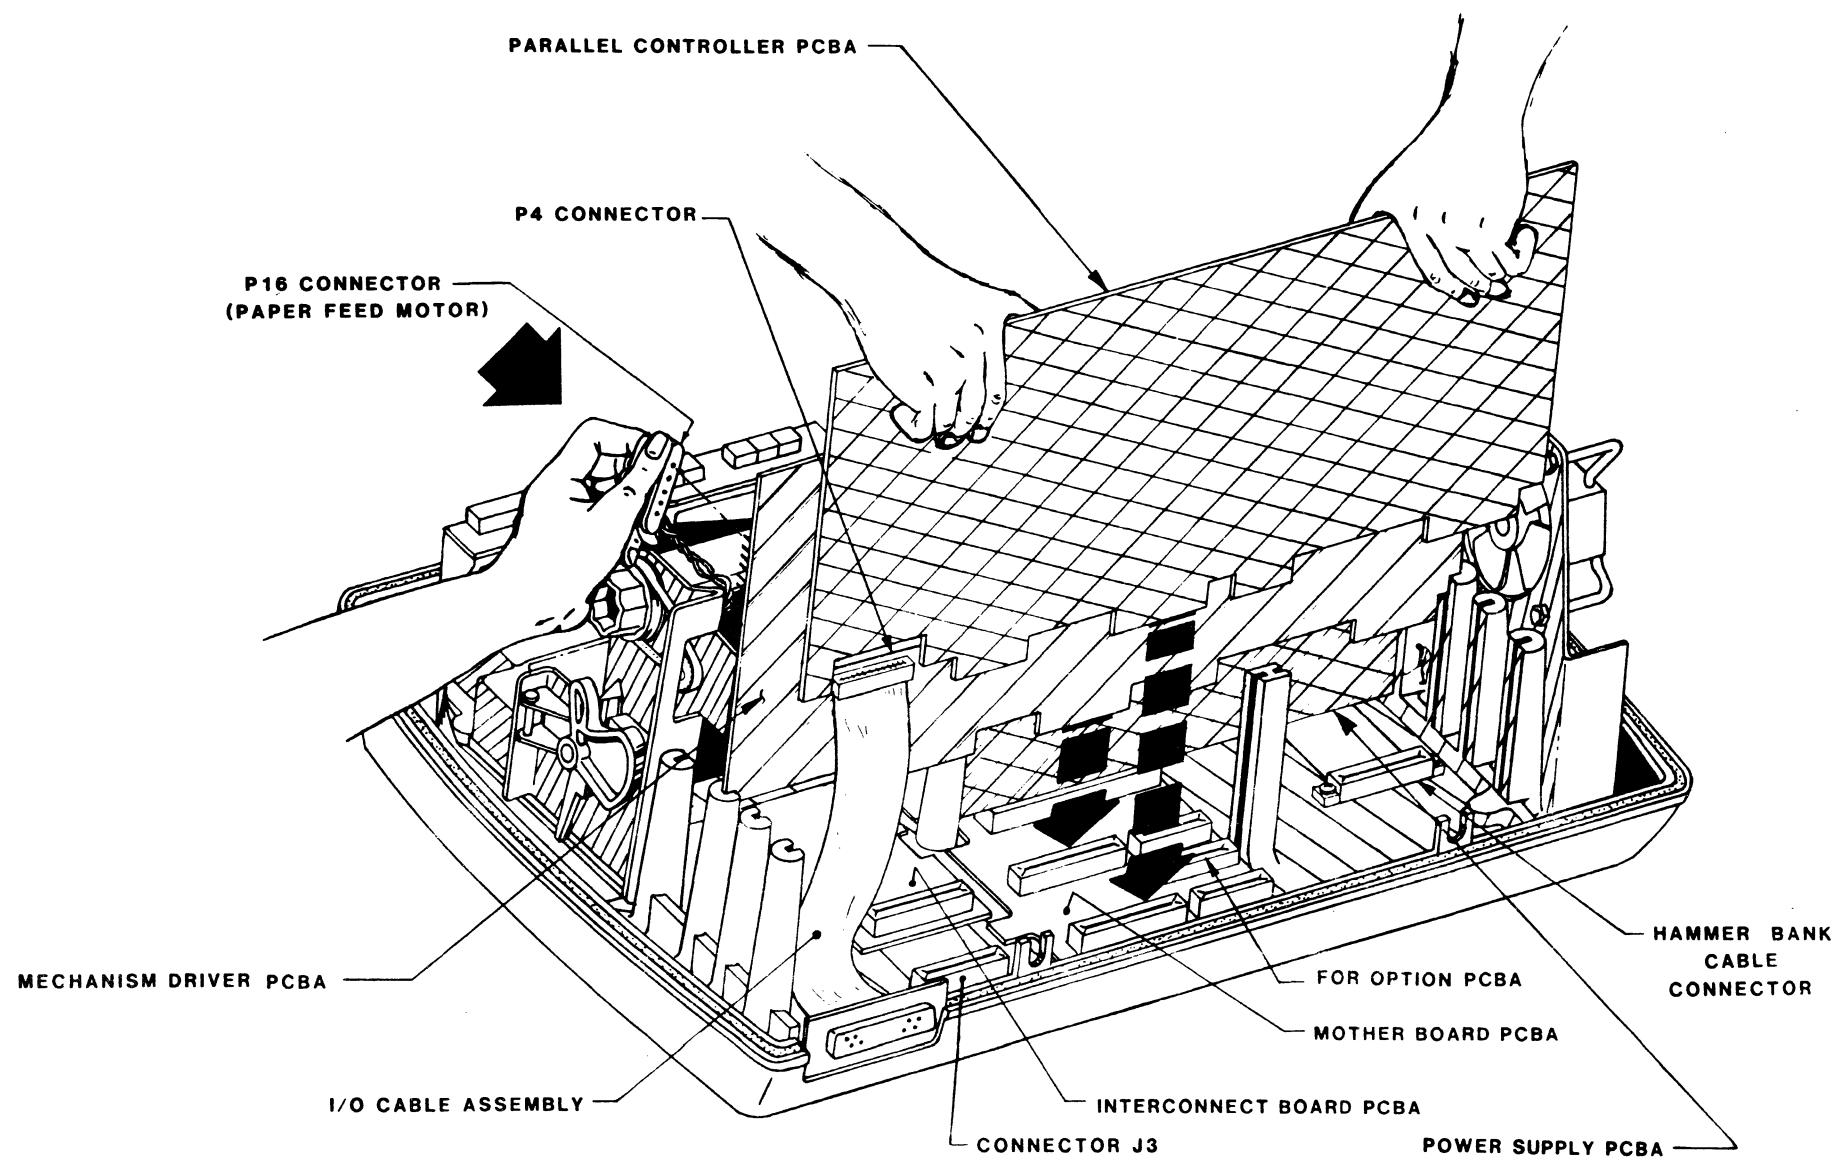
Rear View of Printer, Major PCBAs in Place
